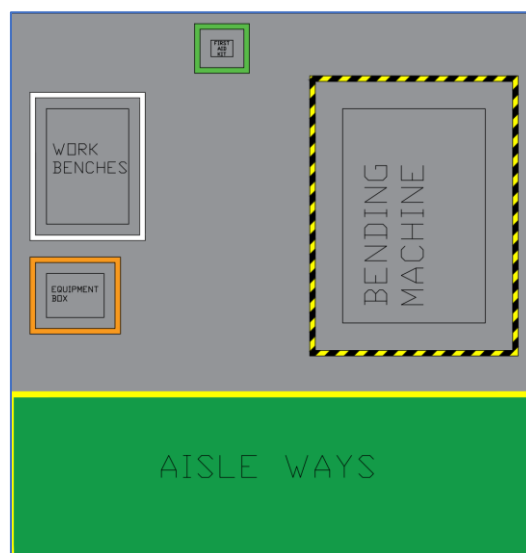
Placement of First Aid Kit and Floor Marking Tape
